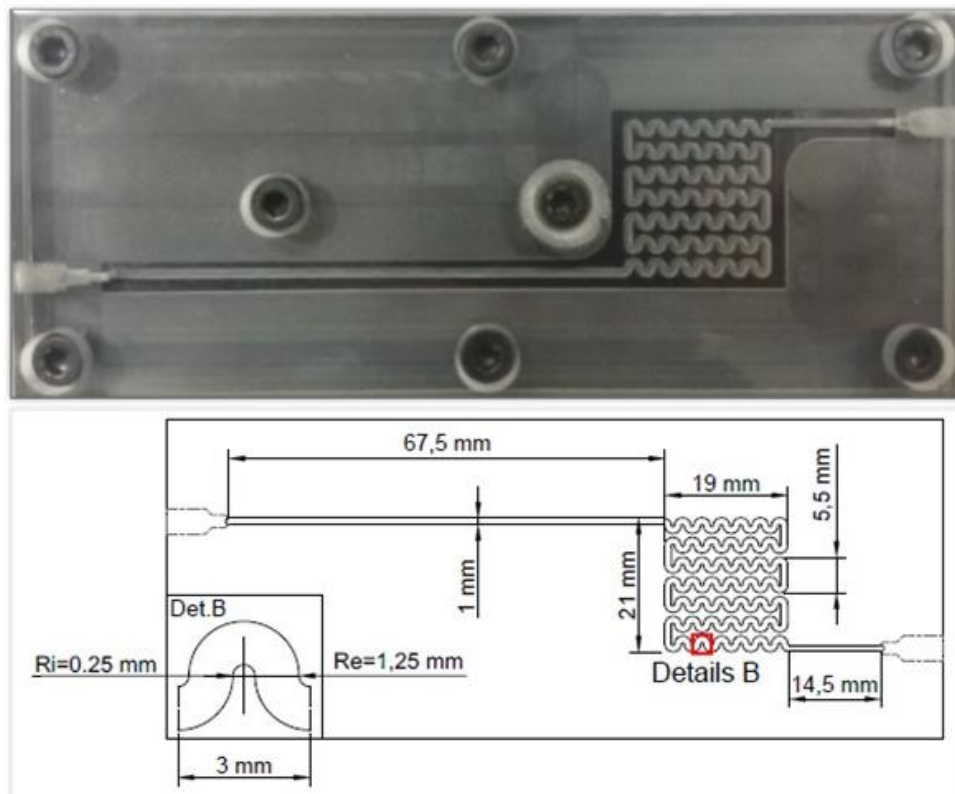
Top view and CAD drawing of the wavy-sinusoidal serpentine.
